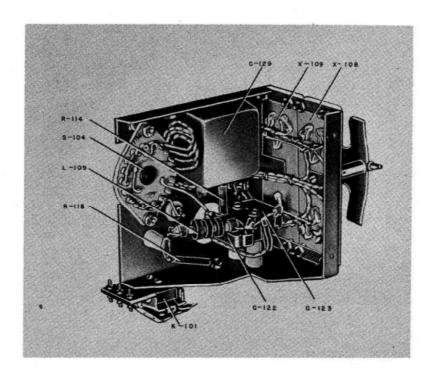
Transmitter Crystal-Bracket Assembly - Bottom View
